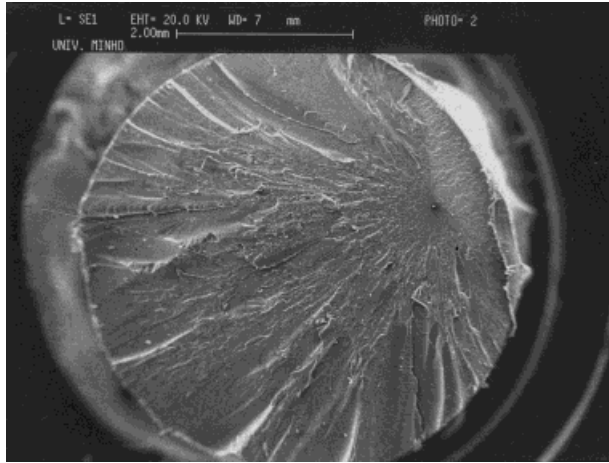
Typical tensile fracture surface of CM-S moldings.
